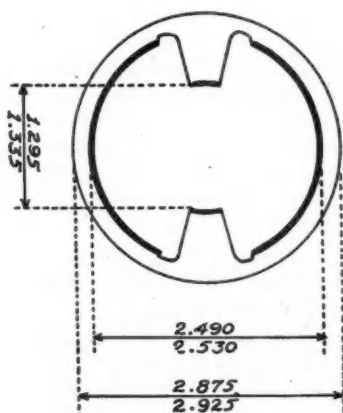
Drawing of Ring Wing showing the internal segments (heavy arcs) which are roughed and finished by broaching
